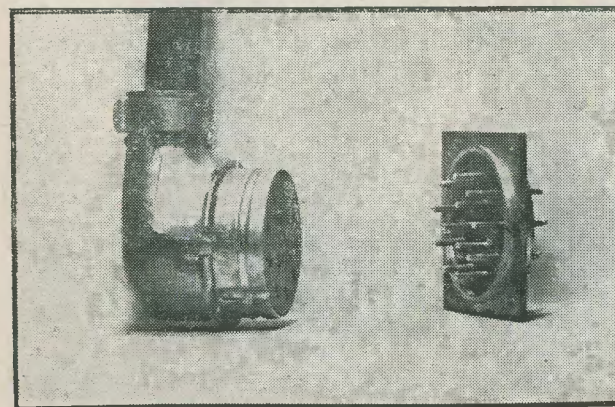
A completed chassis plug (originally 10H-396) and the American cable socket, ZAIUS-10624, with which it mates.
